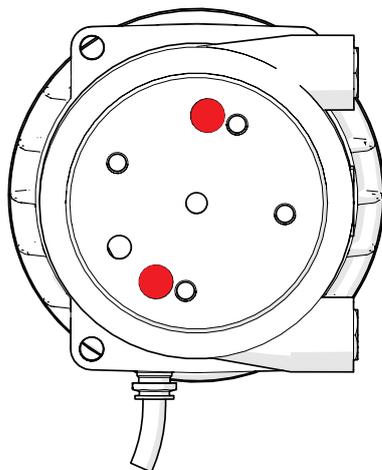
When installing the top and the bottom, always use the two holes that are located at the points marked here.
